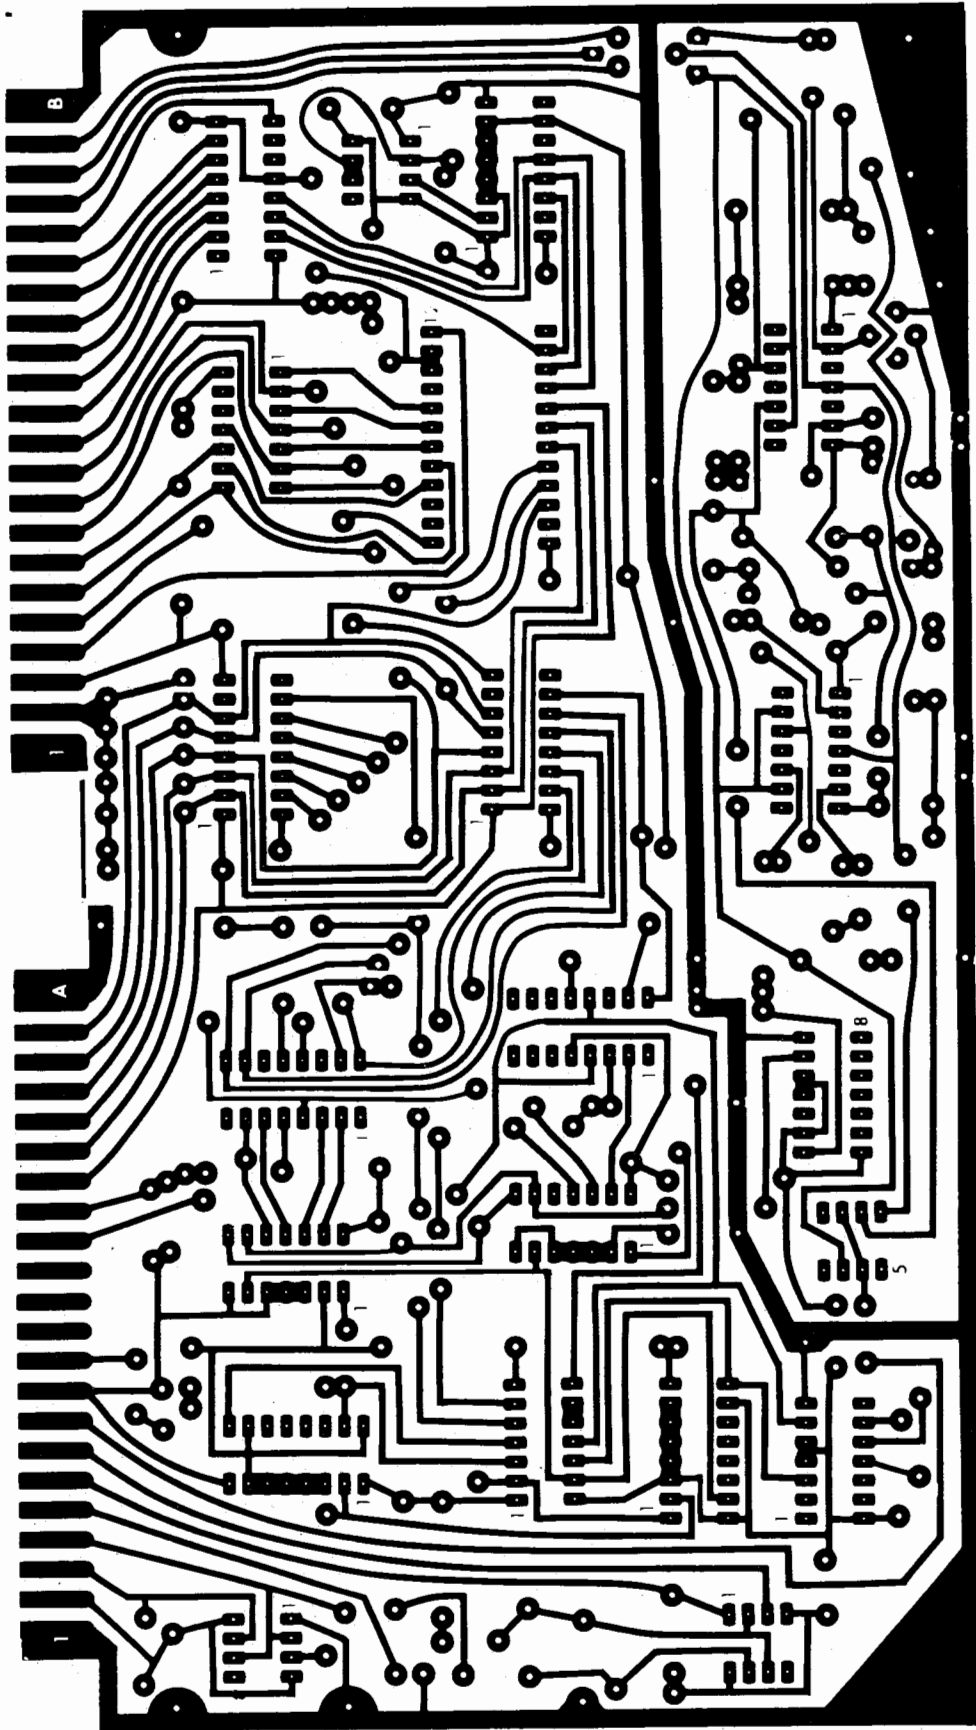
Component placement guide is at right. Etching and drilling guide for pc board opposite.
